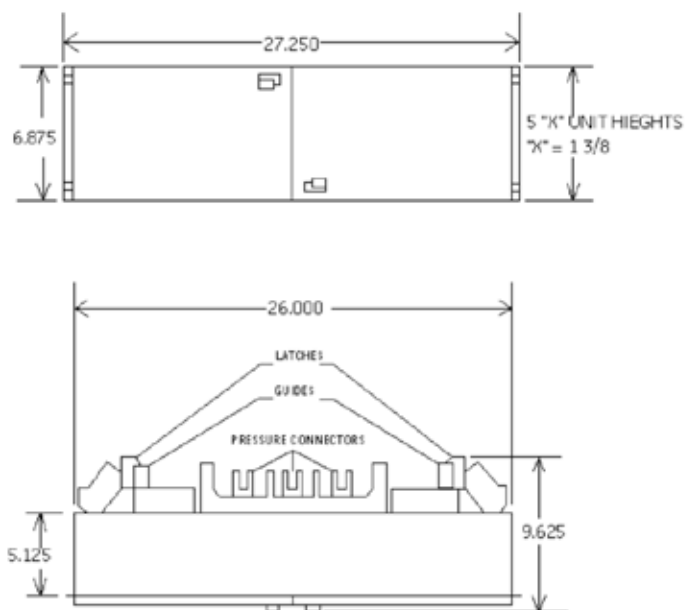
Dimensioned drawing of the Voltage Module (dimensions shown in inches).
